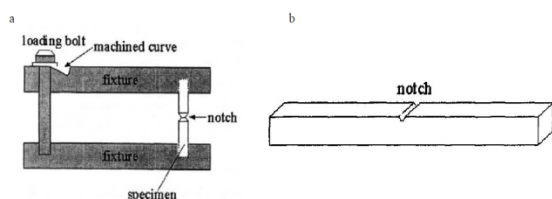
(a) Notched round bar bend by self-loading fixture (After ASTM F519); (b) Type 1e specimen geometry (ASTM F519) [5]
